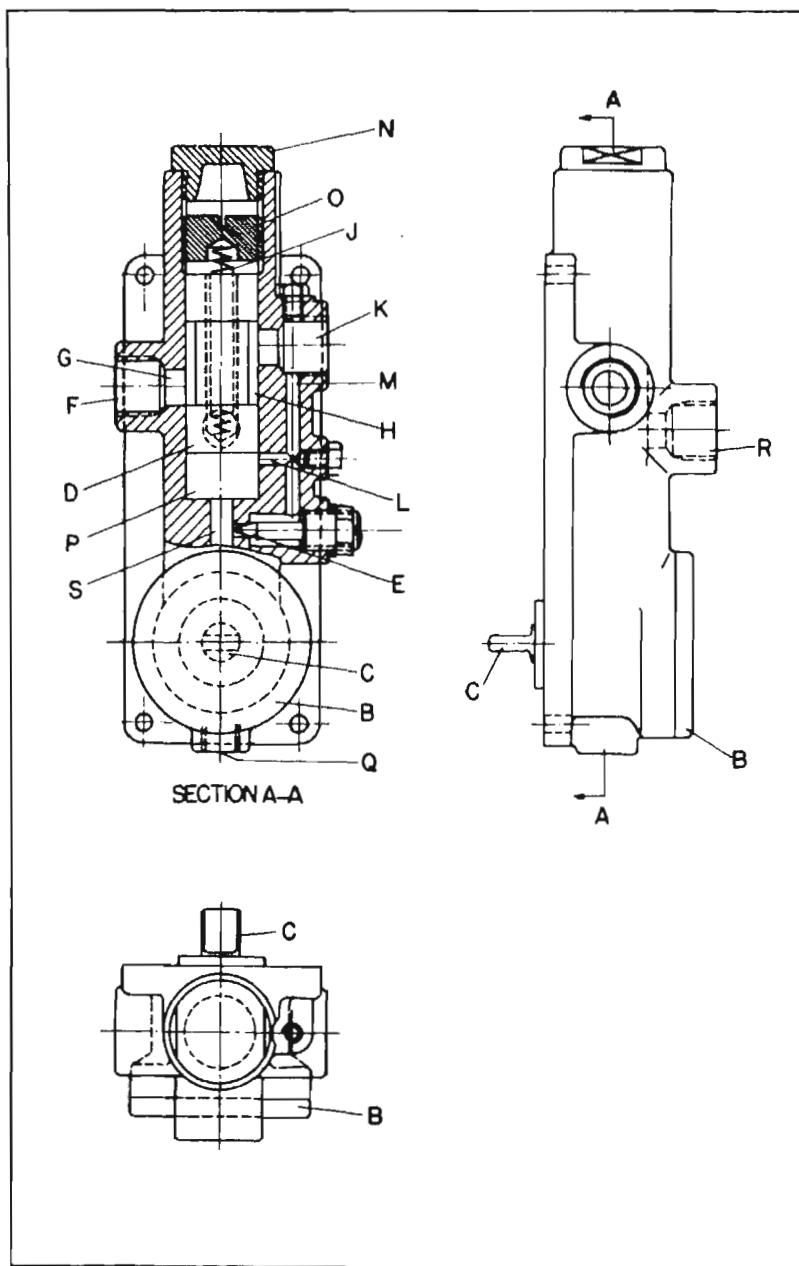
Hydraulic mechanism assures smooth shifting of gears.
